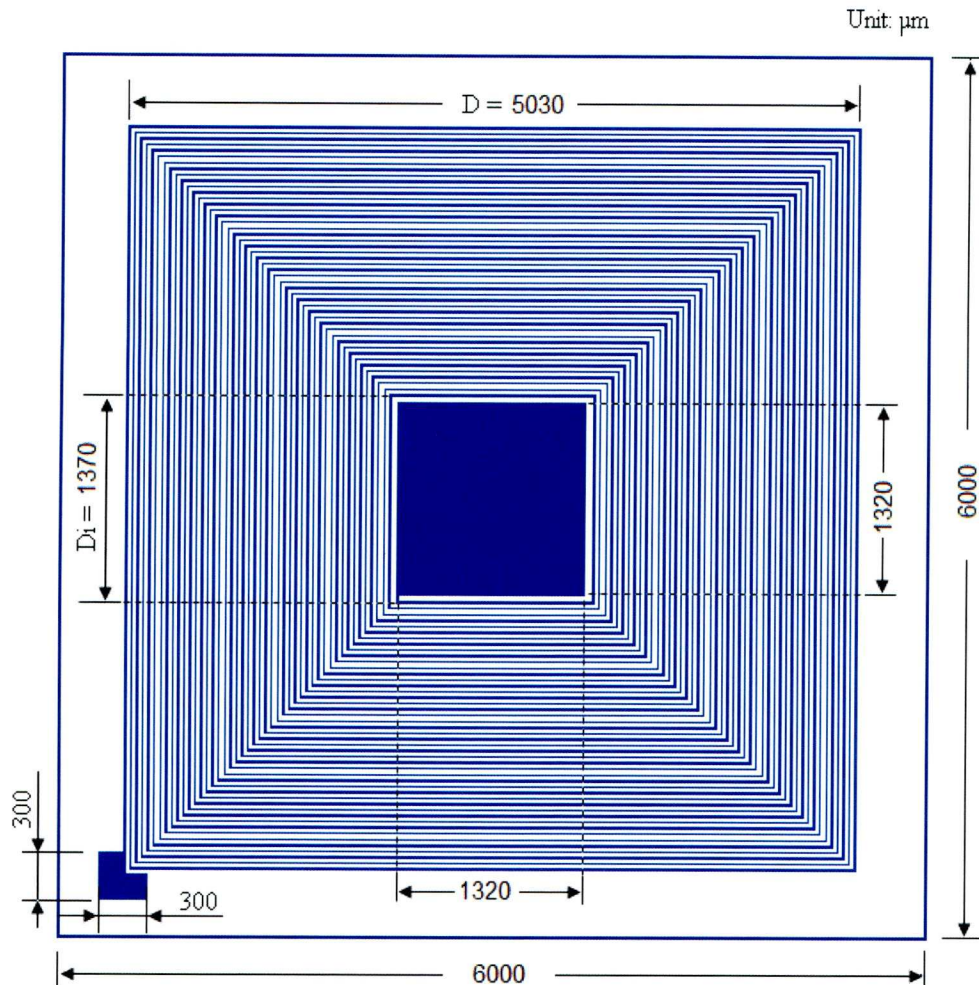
Layout and dimensions of the lower part of Sensor 1 and Sensor 2.
